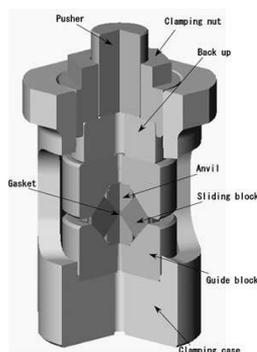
Schematic cross sectional view of clamp type PCAC.
